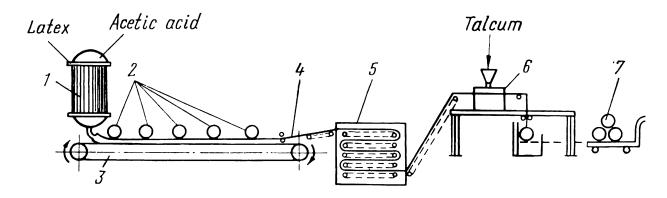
Making rubber from latex on a ribbon-casting machine:
